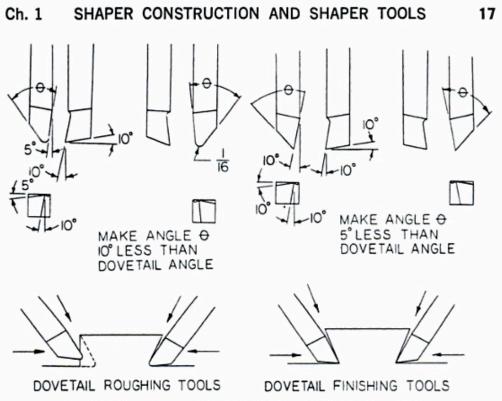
Dovetail roughing tools (left) and finishing tools (right).
